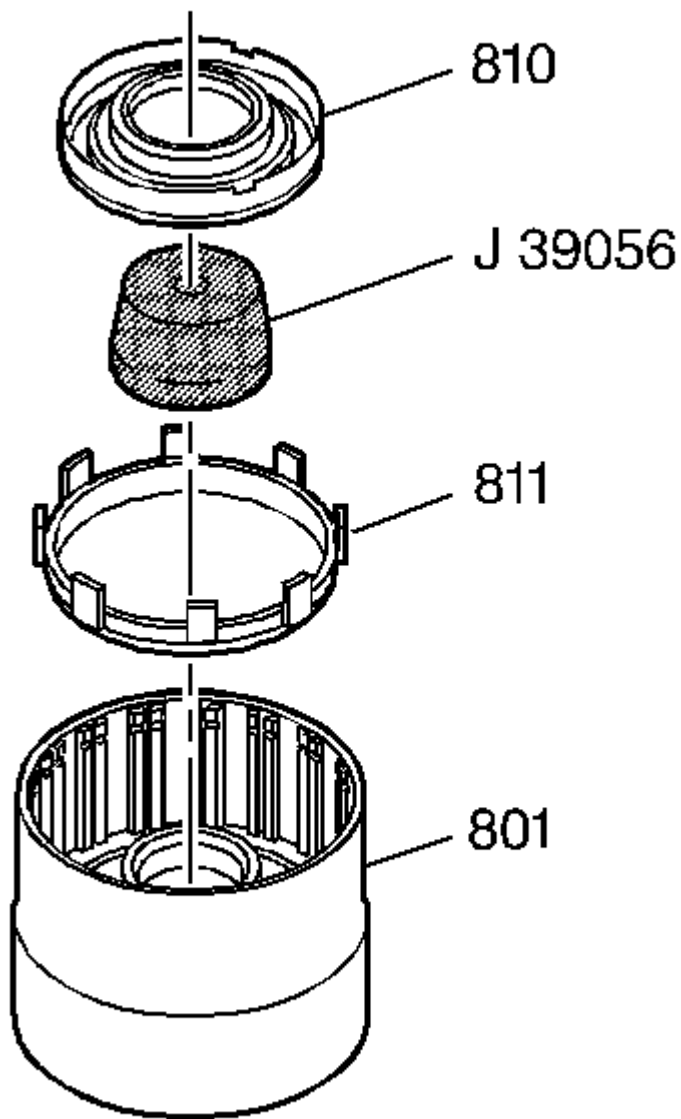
Installing Coast Clutch Piston Assembly Into Coast Clutch Housing
